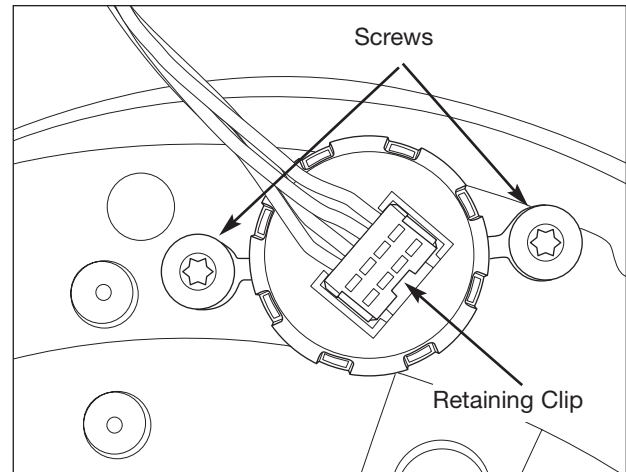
Turbidity Sensor/ Thermistor Removal
